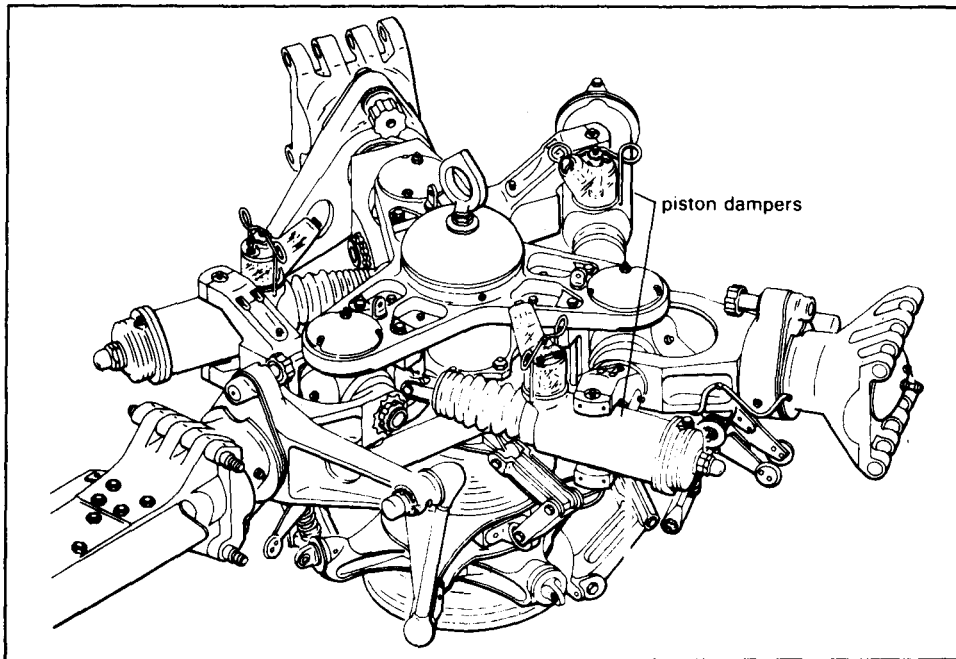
Main rotor assembly with piston-type rotor blade dampers.
